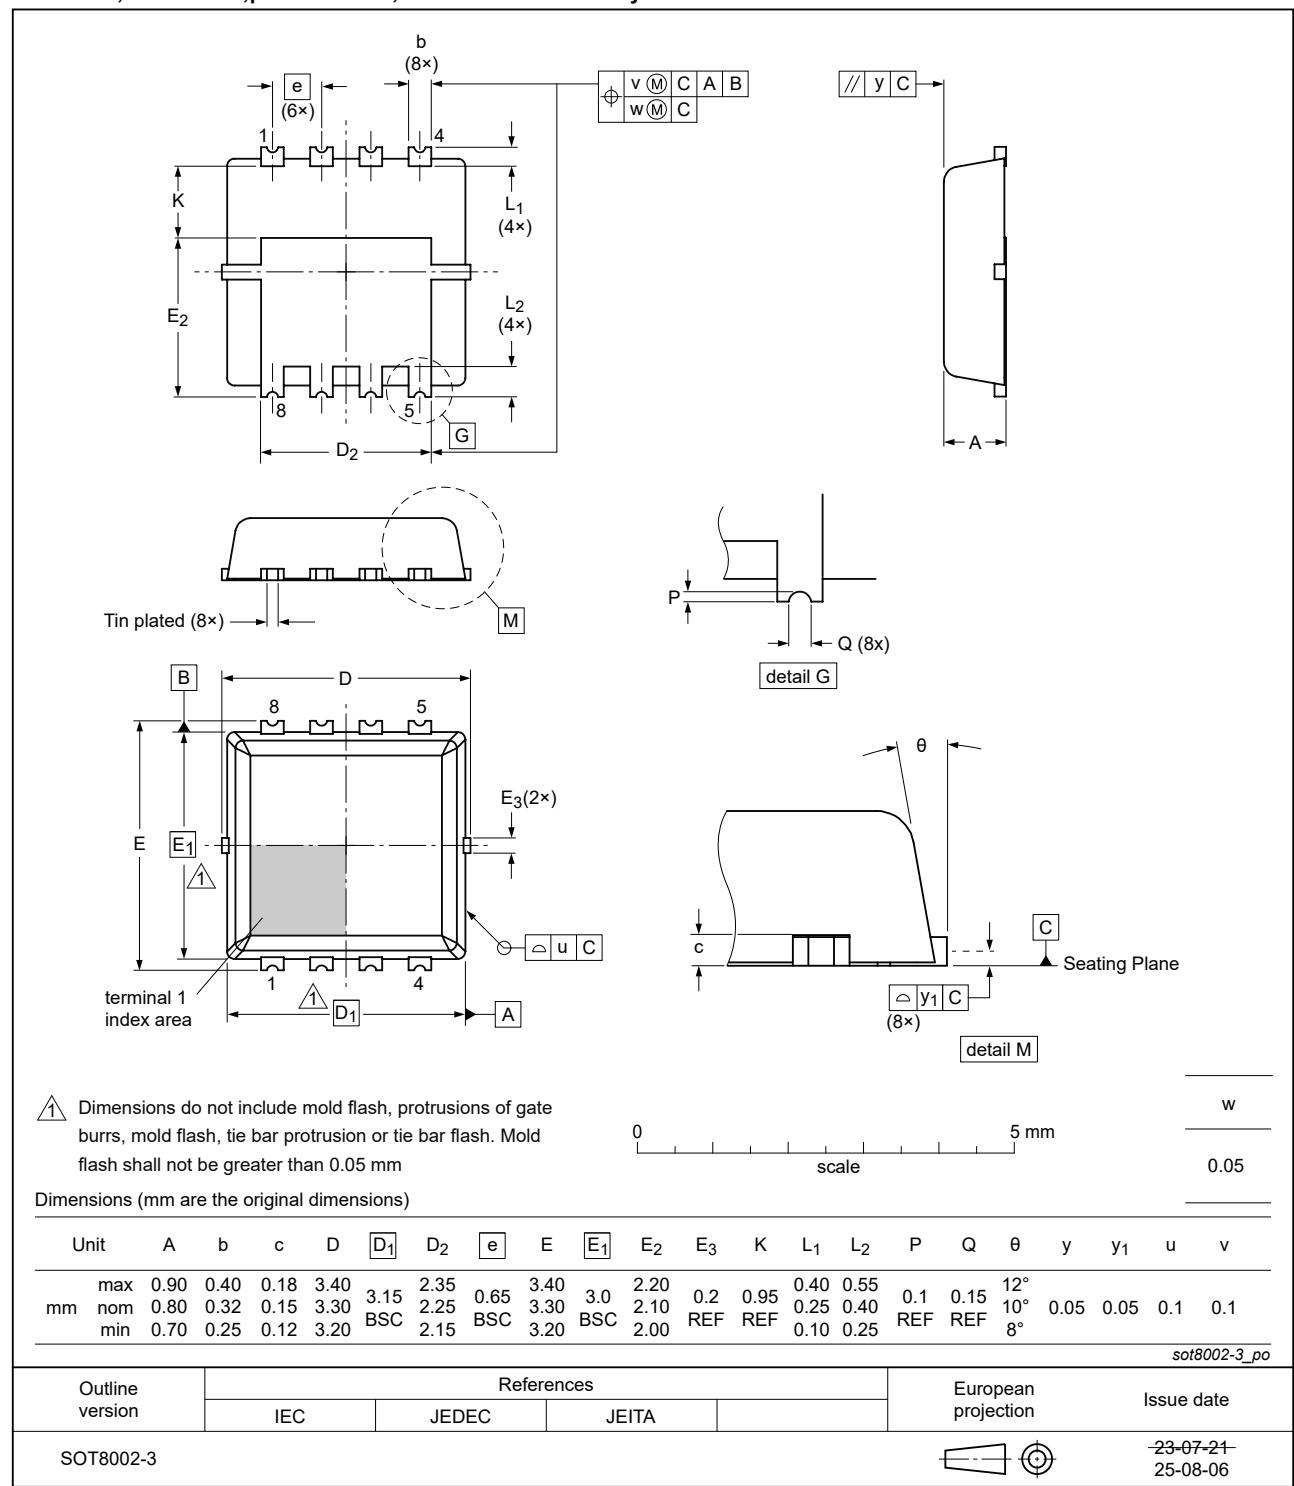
Package outline MLPAK33-WF (SOT8002-3)
